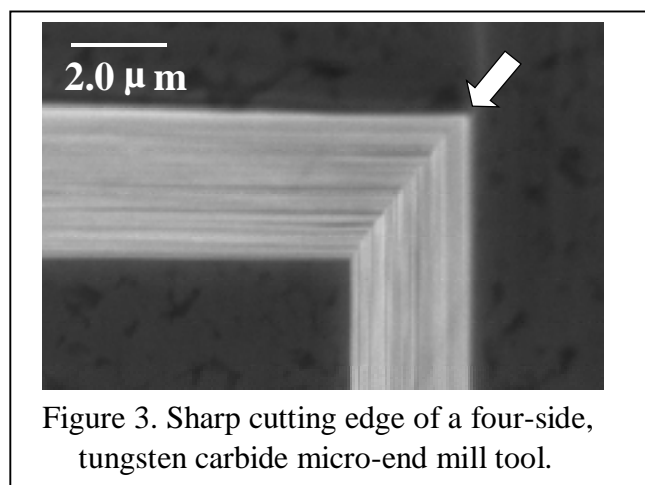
Sharp cutting edge of a four-side, tungsten carbide micro-end mill tool.
